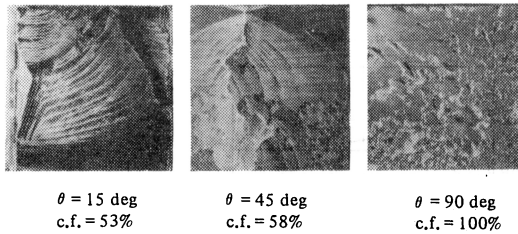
Fracture surfaces of the adhesive layer of the scarf joints. (c.f.: percentage cohesion failure on the basis of bond area)
